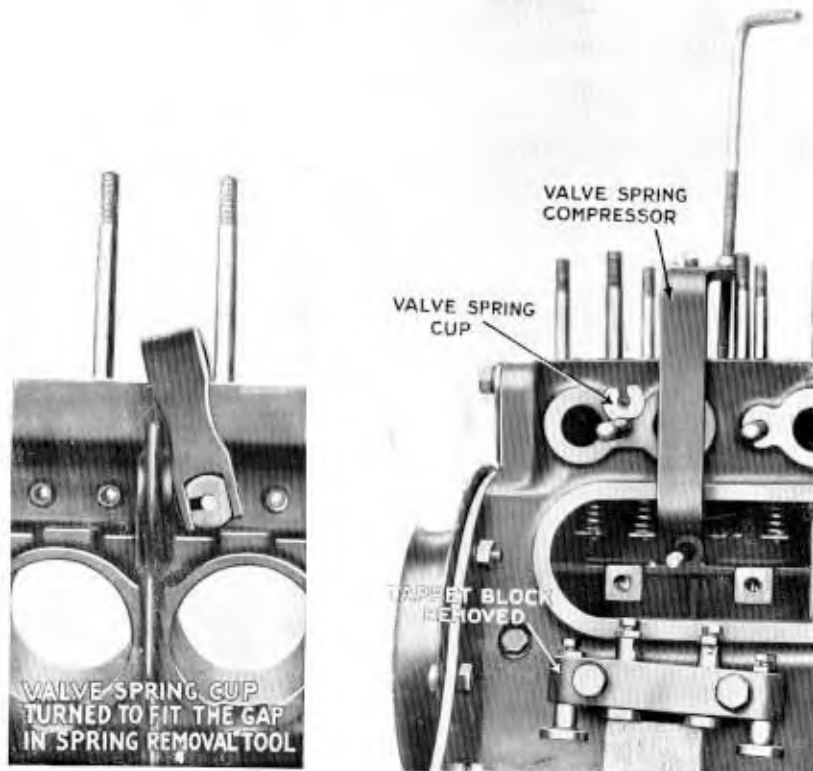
Showing application of Valve Spring Compressor. View from underneath.
